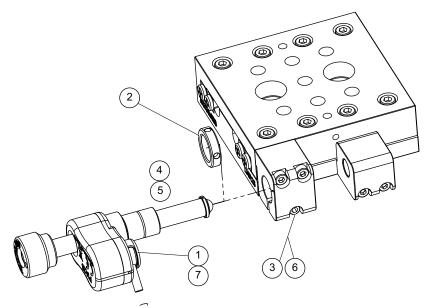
Fitting a PIA25 to a LNR25 Stage
